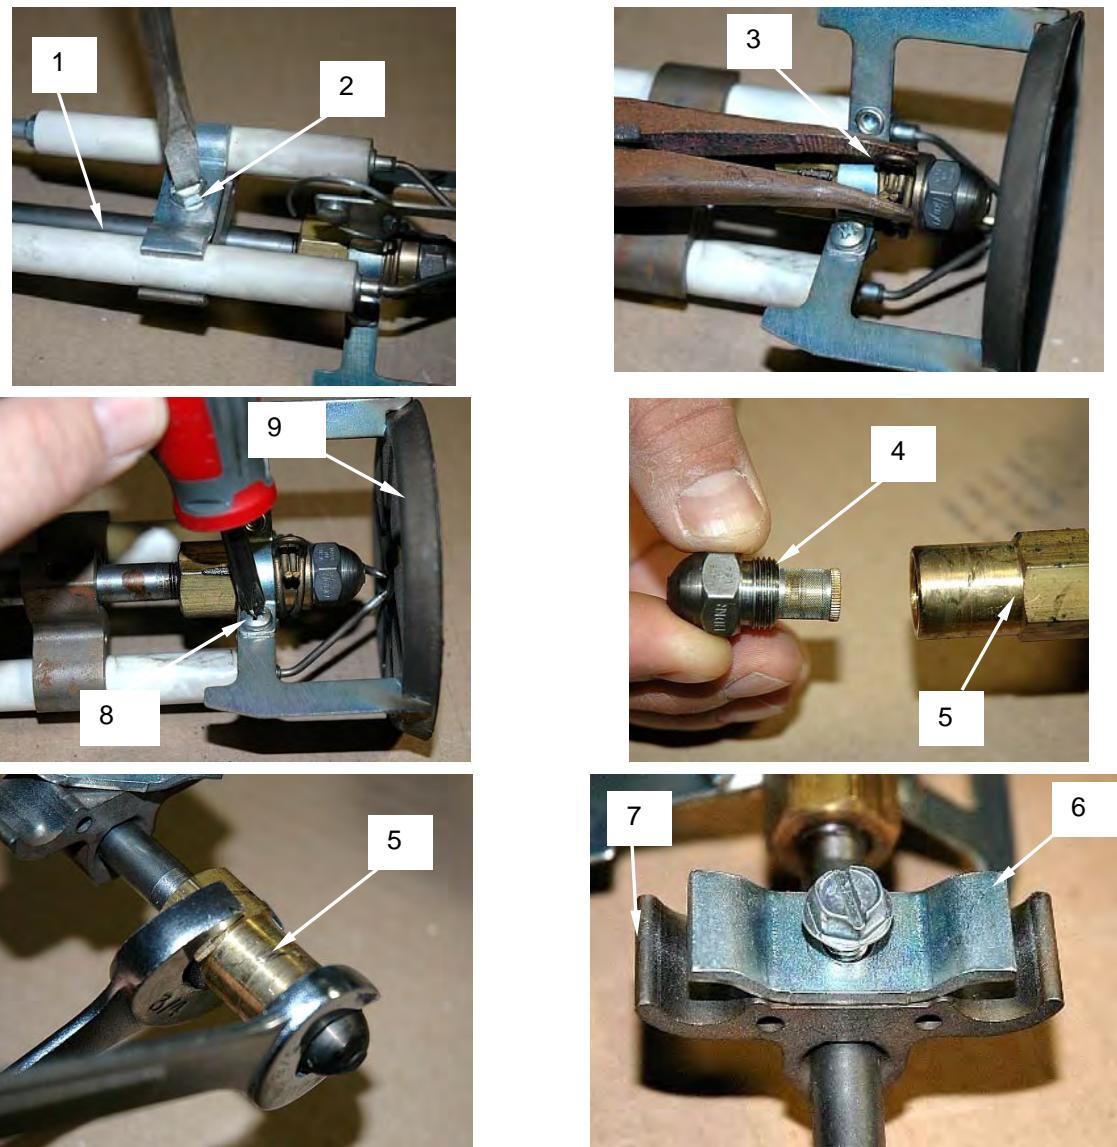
Replace Burner Nozzle and Electrode Assembly.
